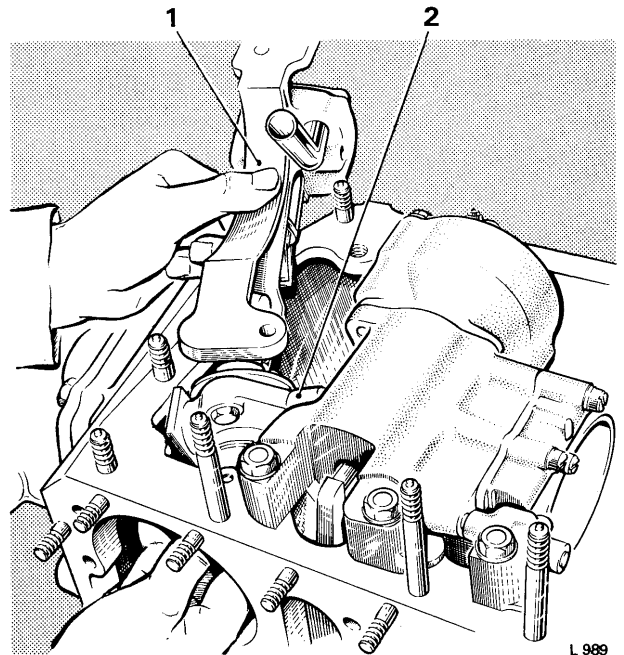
REMOVING THE REAR PUMP AND GOVERNOR
